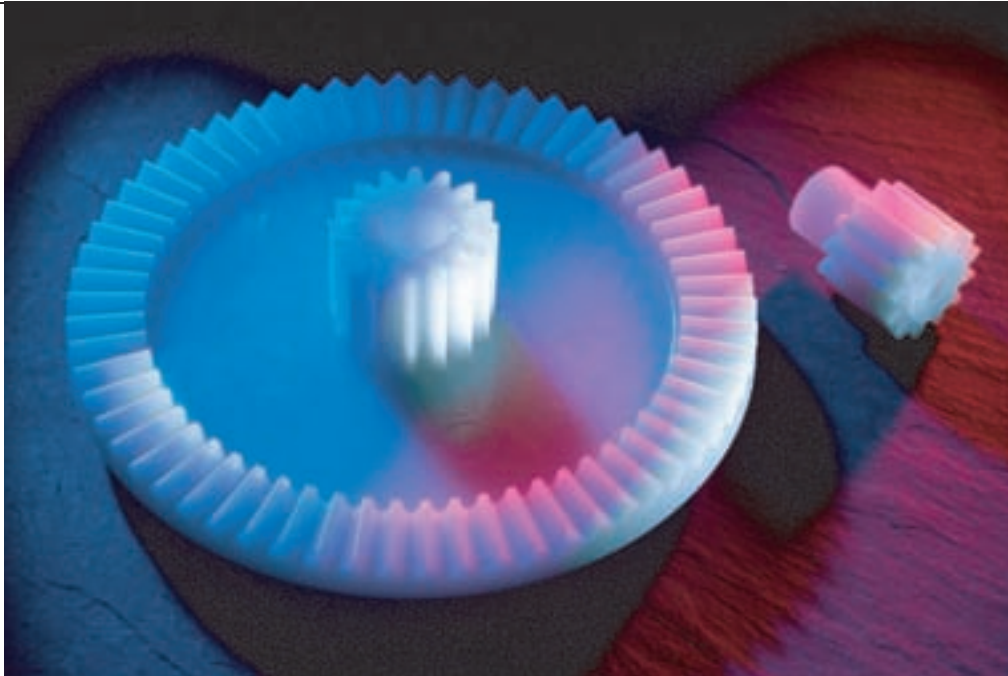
Example of a 0.8 module, 62:12 ratio face gear set, 90° shaft angle.
